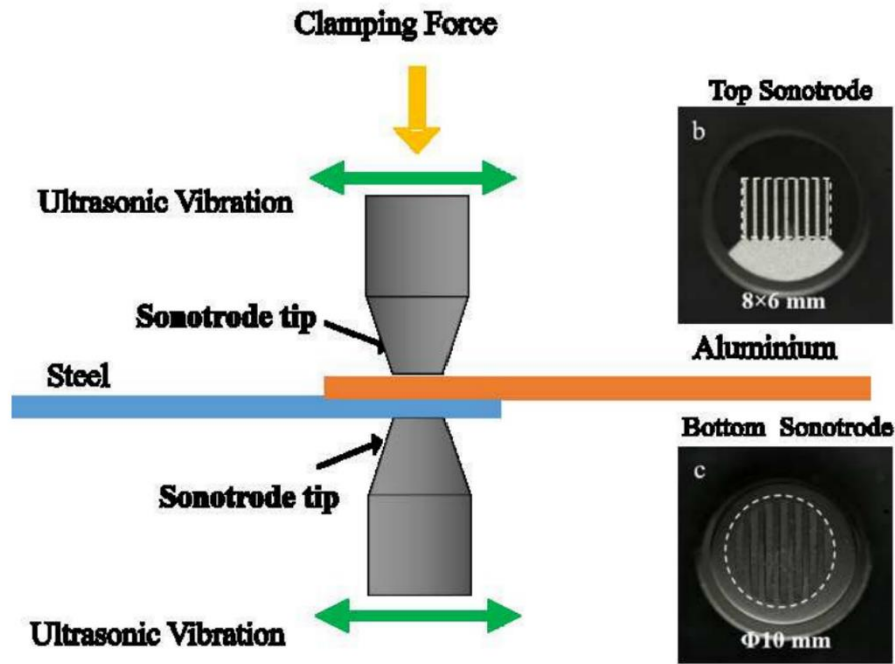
Setup for ultrasonic welding of aluminum to steel [31]
